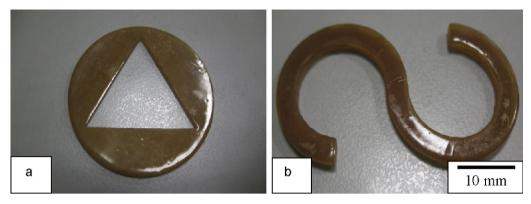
Two resin prototypes made by Stereolithography on rapid prototyping machine.
